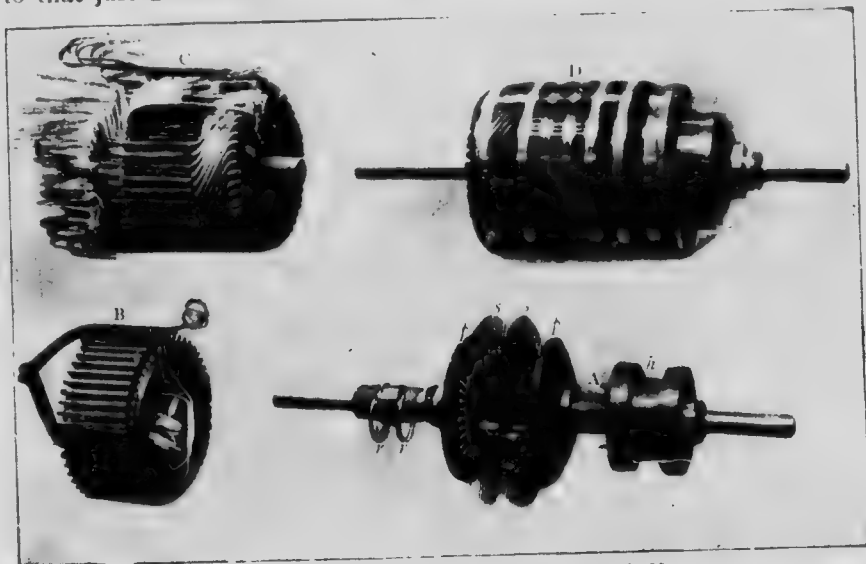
Details of the Armature of a Peebles Four-Pole Motor.
